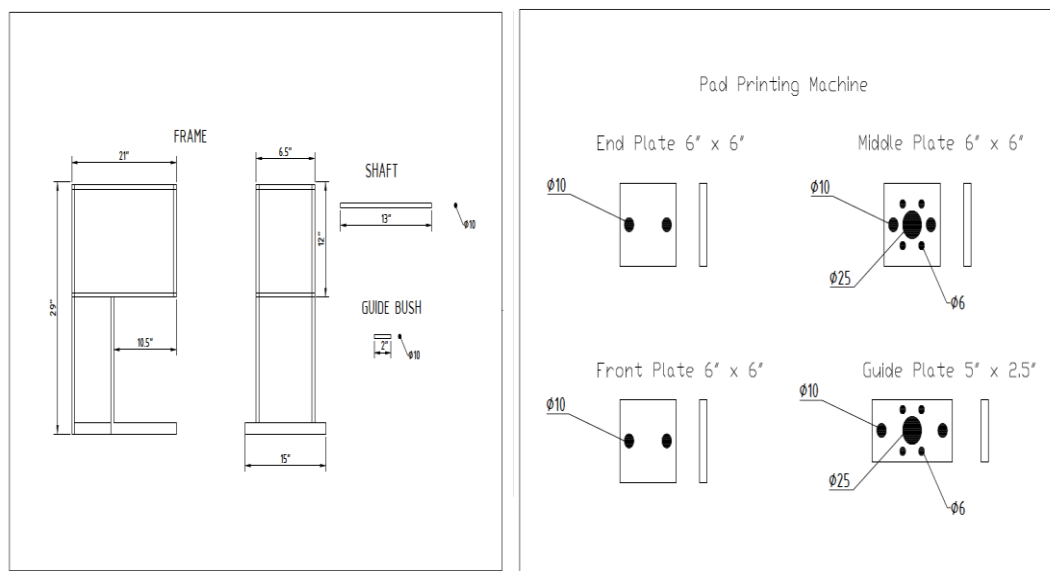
AutoCAD drawing of frame, shaft, guide bush & different plates
